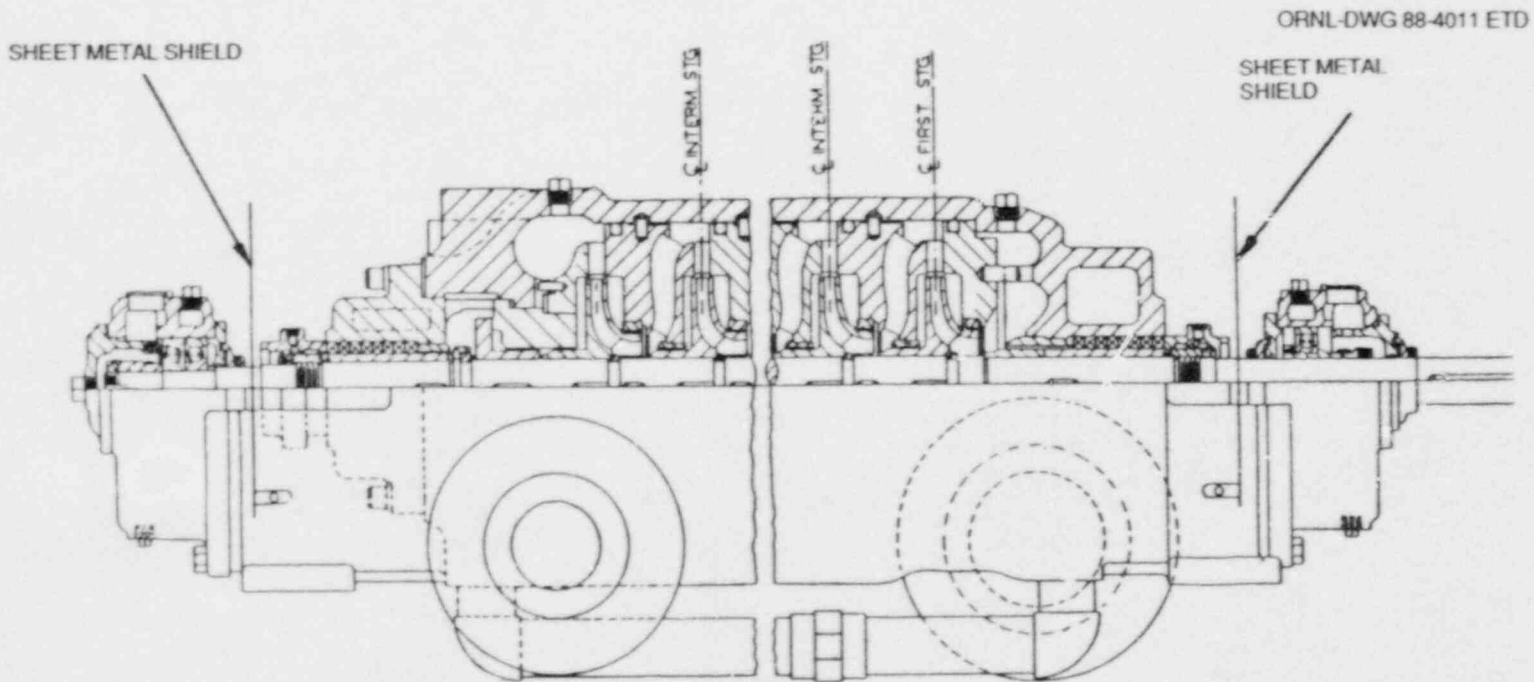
Bearing housing shield. Adapted with permission from F. J. Mollerus, R. D. Allen, and J. D. Gilcrest, *Failures Related to Surveillance Testing of Standby Equipment, Vol. 1: Emergency Pumps*, EPRI NP-4264, Vol. 1, Electric Power Research Institute, October 1985.
